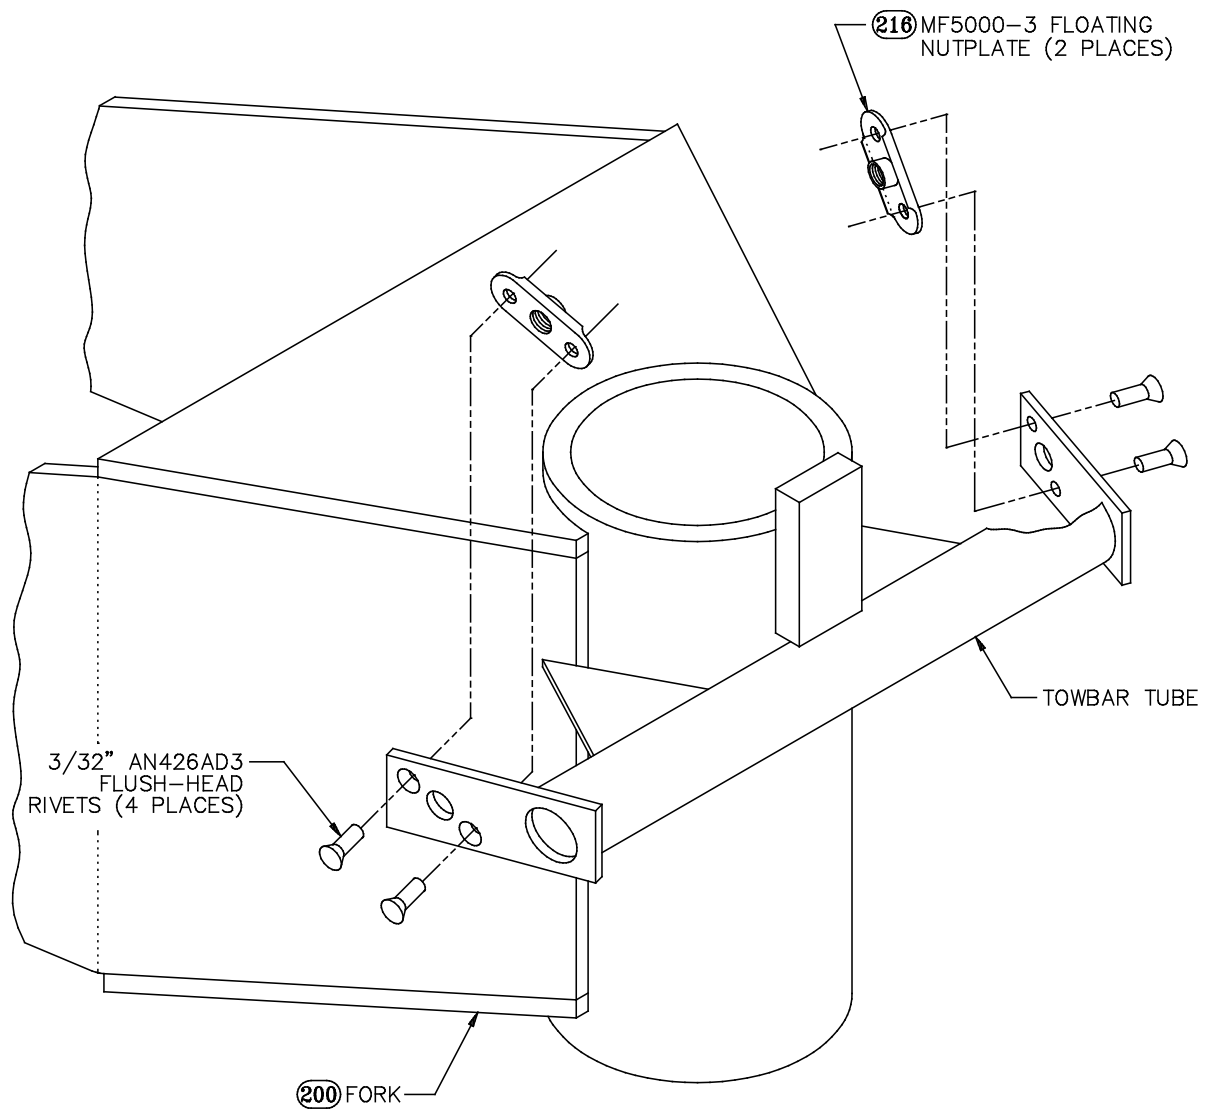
Riveting the Nutplates to the Forward Wheel Pant Mounting Brackets
